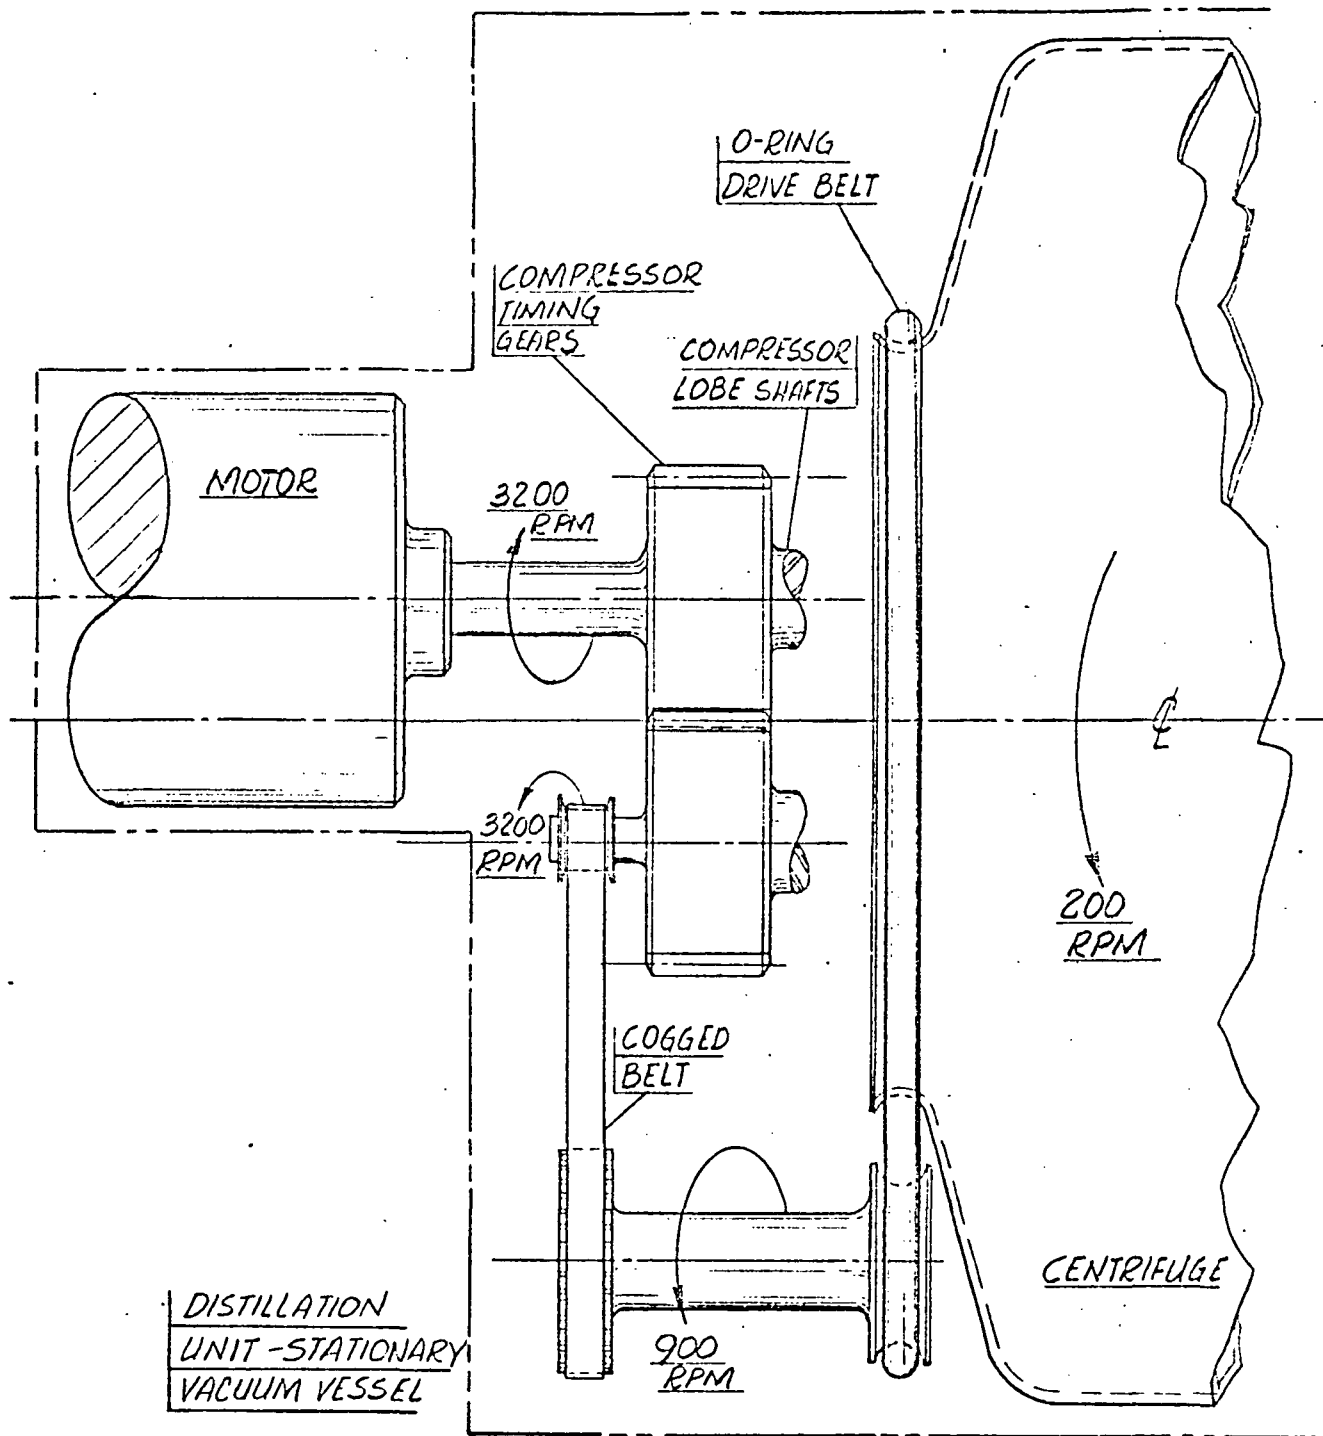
COMPRESSOR & CENTRIFUGE DRIVE
